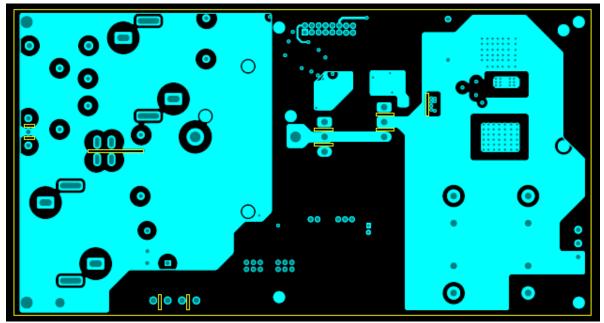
Power board layout, inner layer 2 of TO-247 vision
